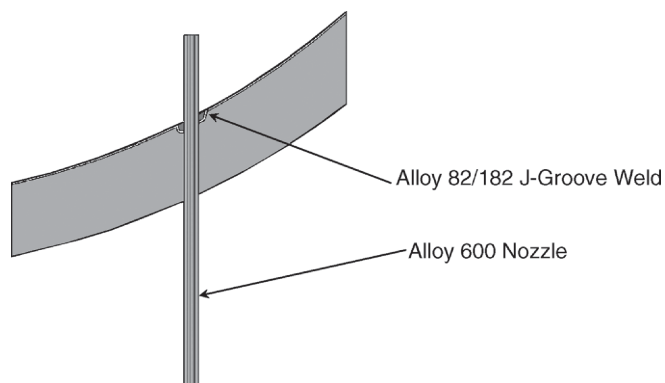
TYPICAL BOTTOM-MOUNTED INSTRUMENT (BMI) NOZZLE
